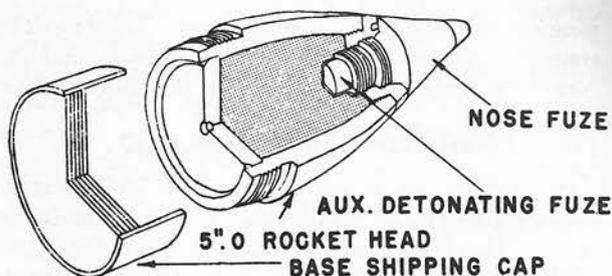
B2.—Rocket Head Mark 7, with fuze.
